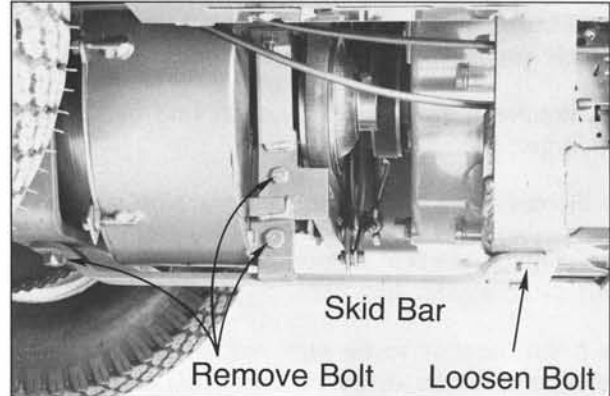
GHS Blower Mount Disassembly for Blower Removal
